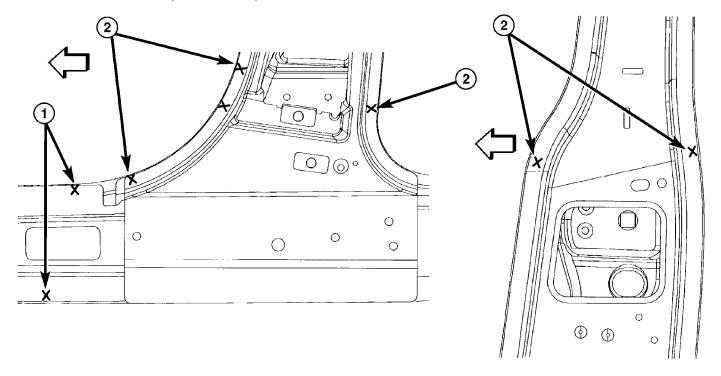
OUTER LOAD BEAM TO FRONT HINGE PILLAR
